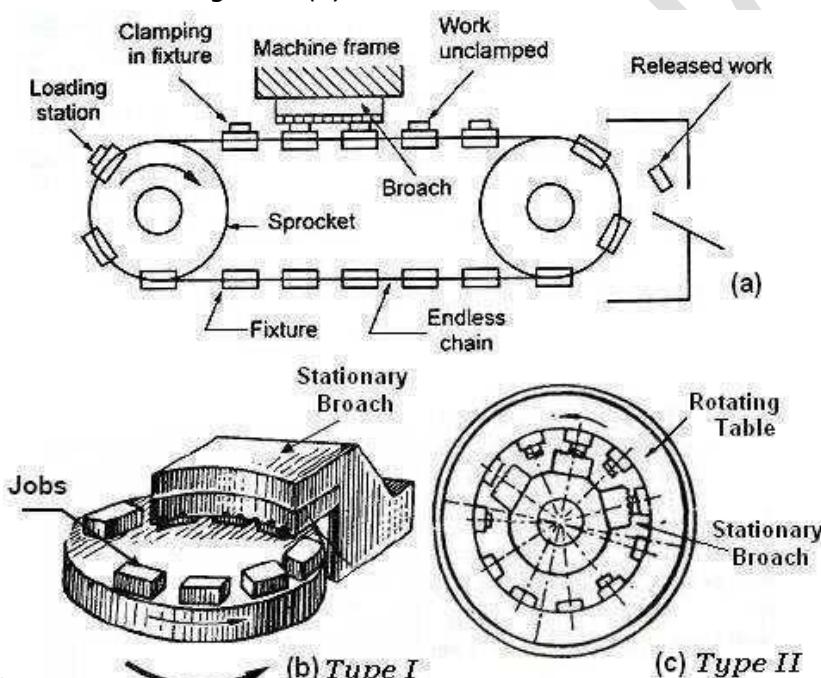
Continuous broaching machine (a) Horizontal type (b) and (c) Rotary type
